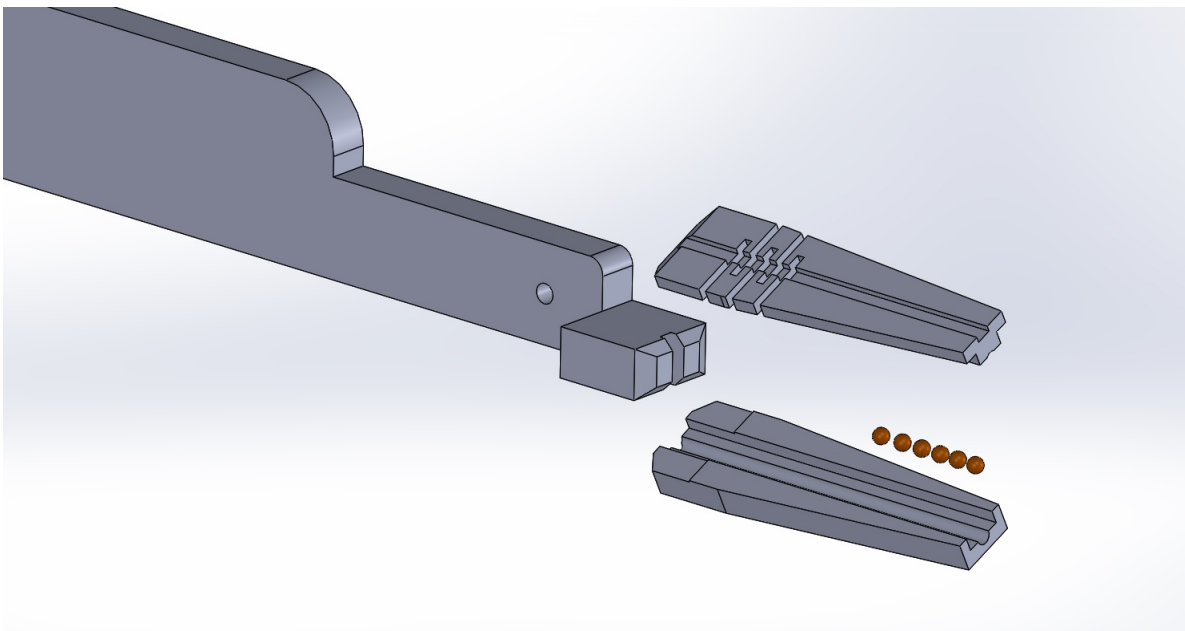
Expanded view of the 1st prototype of the sensorized grasper
